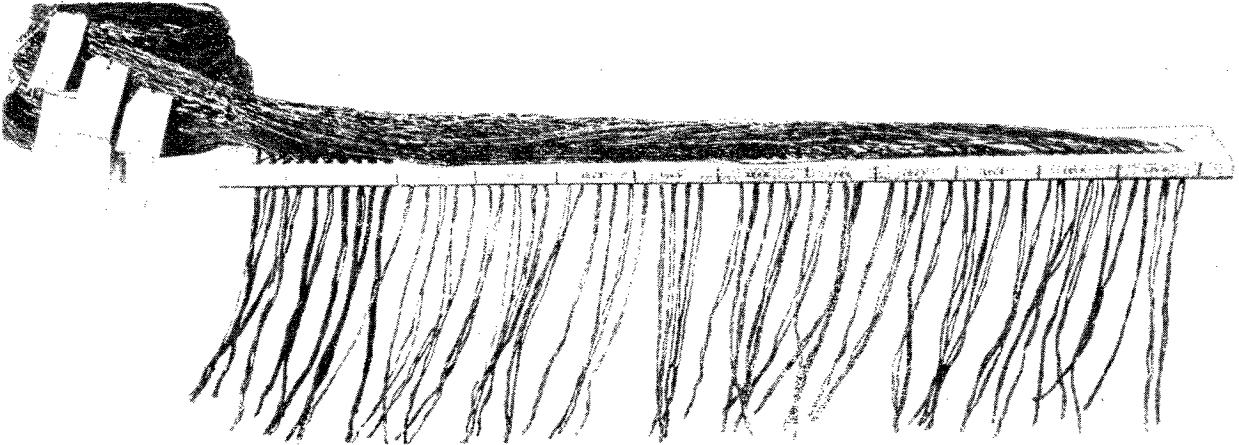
STRIPPED CABLE FORM - STAGE 2.
